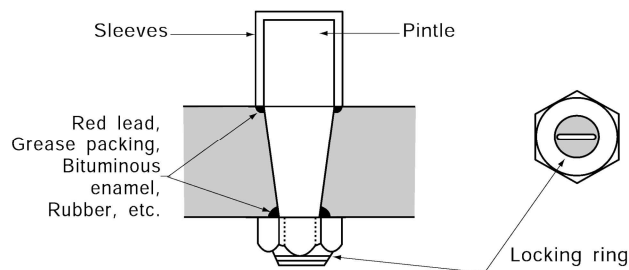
Locking device and preventing device of corrosion of pintle nut
